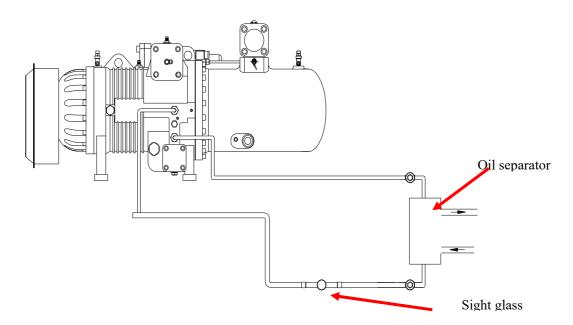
LB-100~280-PLUS Piping drawing of external oil cooling type oil circuit-single type
